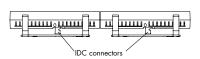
HOUSINGS STAGGERED (TOP VIEW)
